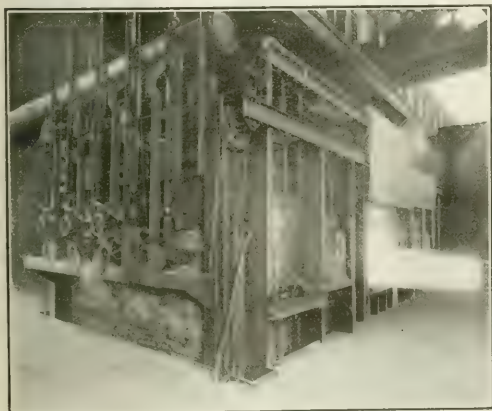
INGOT HEATING FORGE FURNACE EQUIPPED FOR POWDERED COAL BURNING
